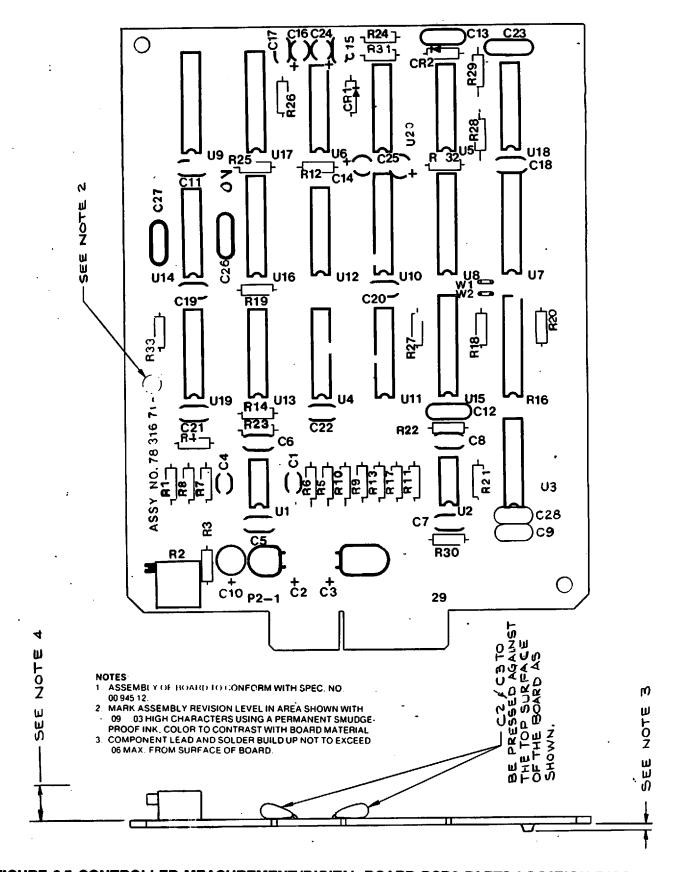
CONTROLLER MEASUREMENT/DIGITAL BOARD PCB2 PARTS LOCATION DIAGRAM
